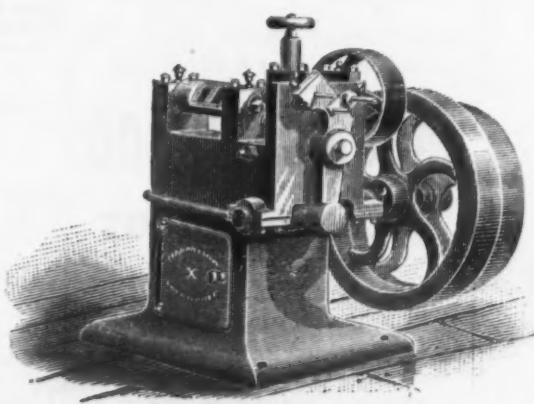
THE MACHINE WITHOUT ATTACHMENT.
